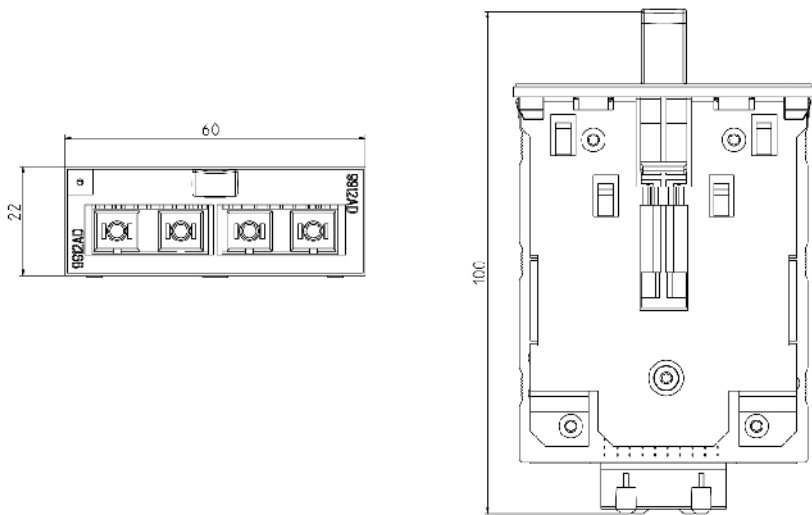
MM900 dimension drawing 4: Optical SC ports
